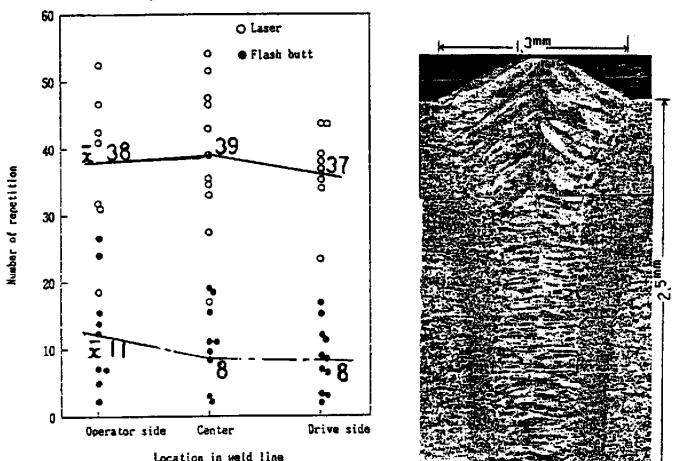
Comparison of welded joint fatigue strengths by reverse bend test (JIS Z 3120) in both laser and flash butt welding of a medium carbon steel.
